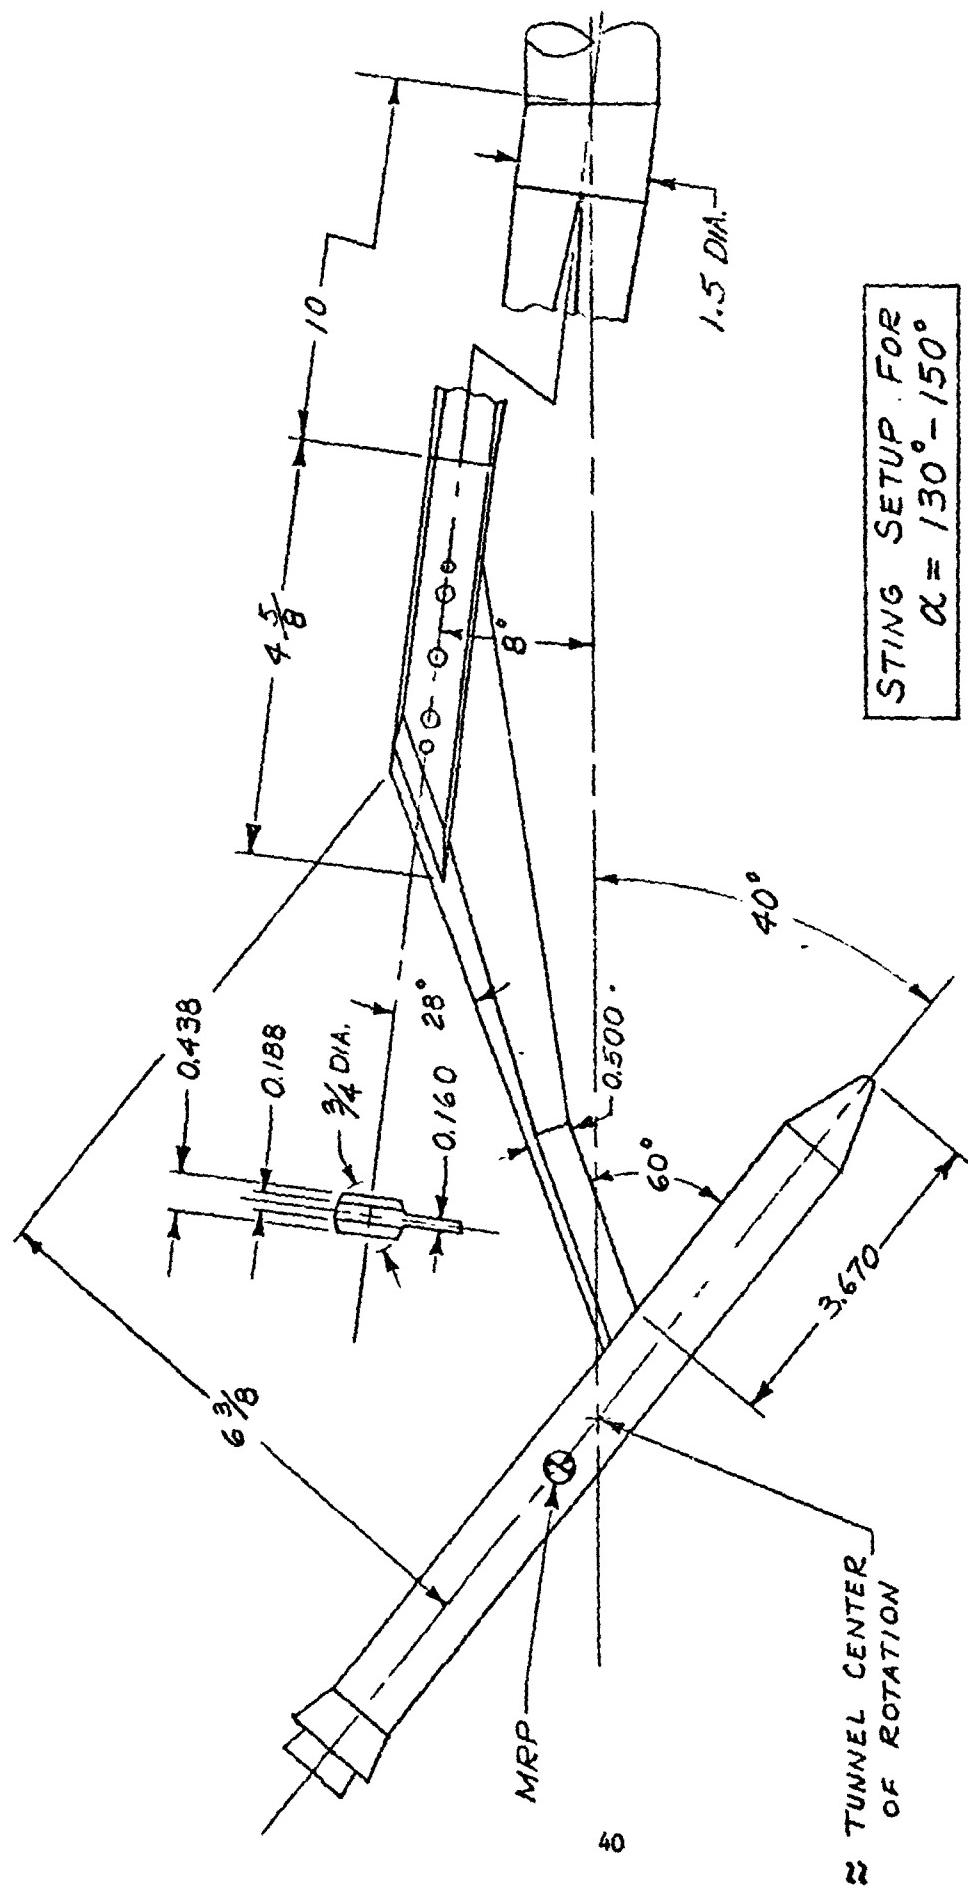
Details of One Piece Side Mounted Sting, No. 131.
